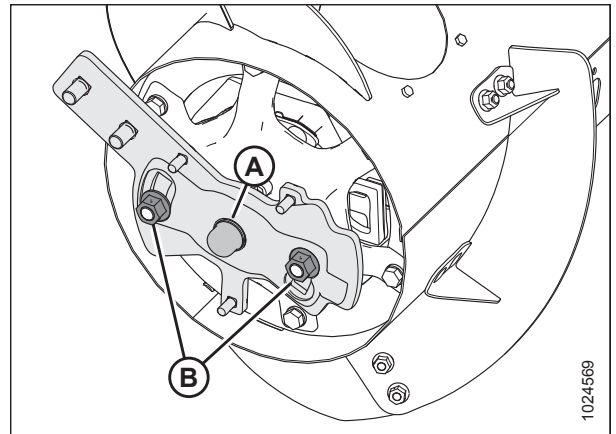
Right End of Feed Auger with Cap Cover Removed
